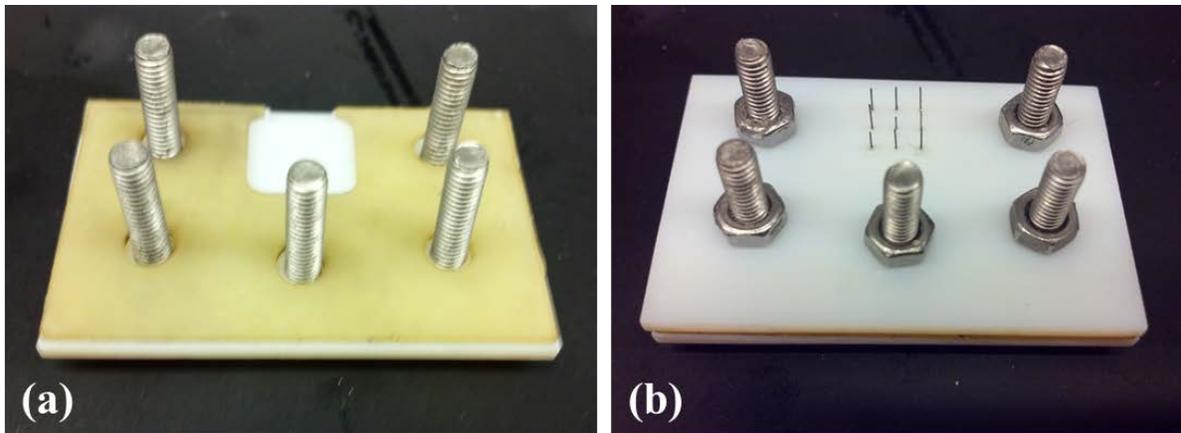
Mold for forming microchannel substrate. (a) One 3D printed side of the mold with rubber gasket in place. (b) Assembled mold with second 3D printed piece and a 3x3 array of wires to form microchannels.
